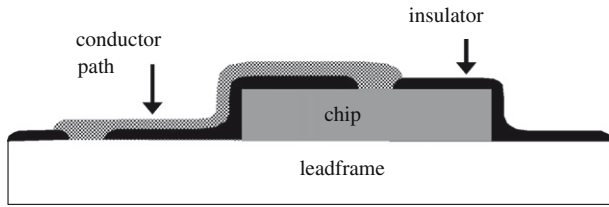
Extract of a module assembly made by first inkjet printing of an insulation layer and then printing of a conductive layer on top.
